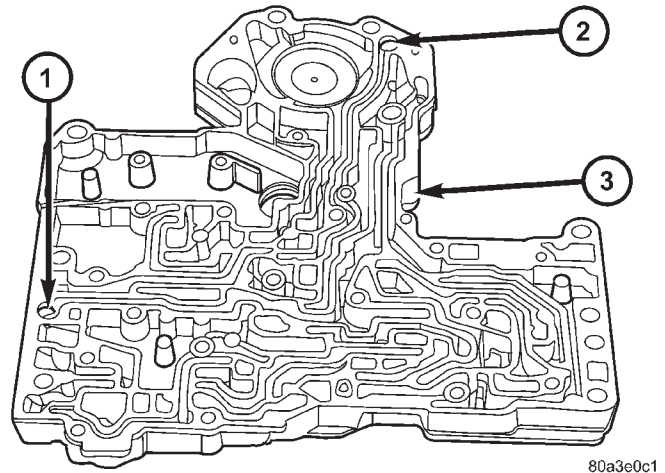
Rear Clutch And Rear Servo Check Ball Locations
